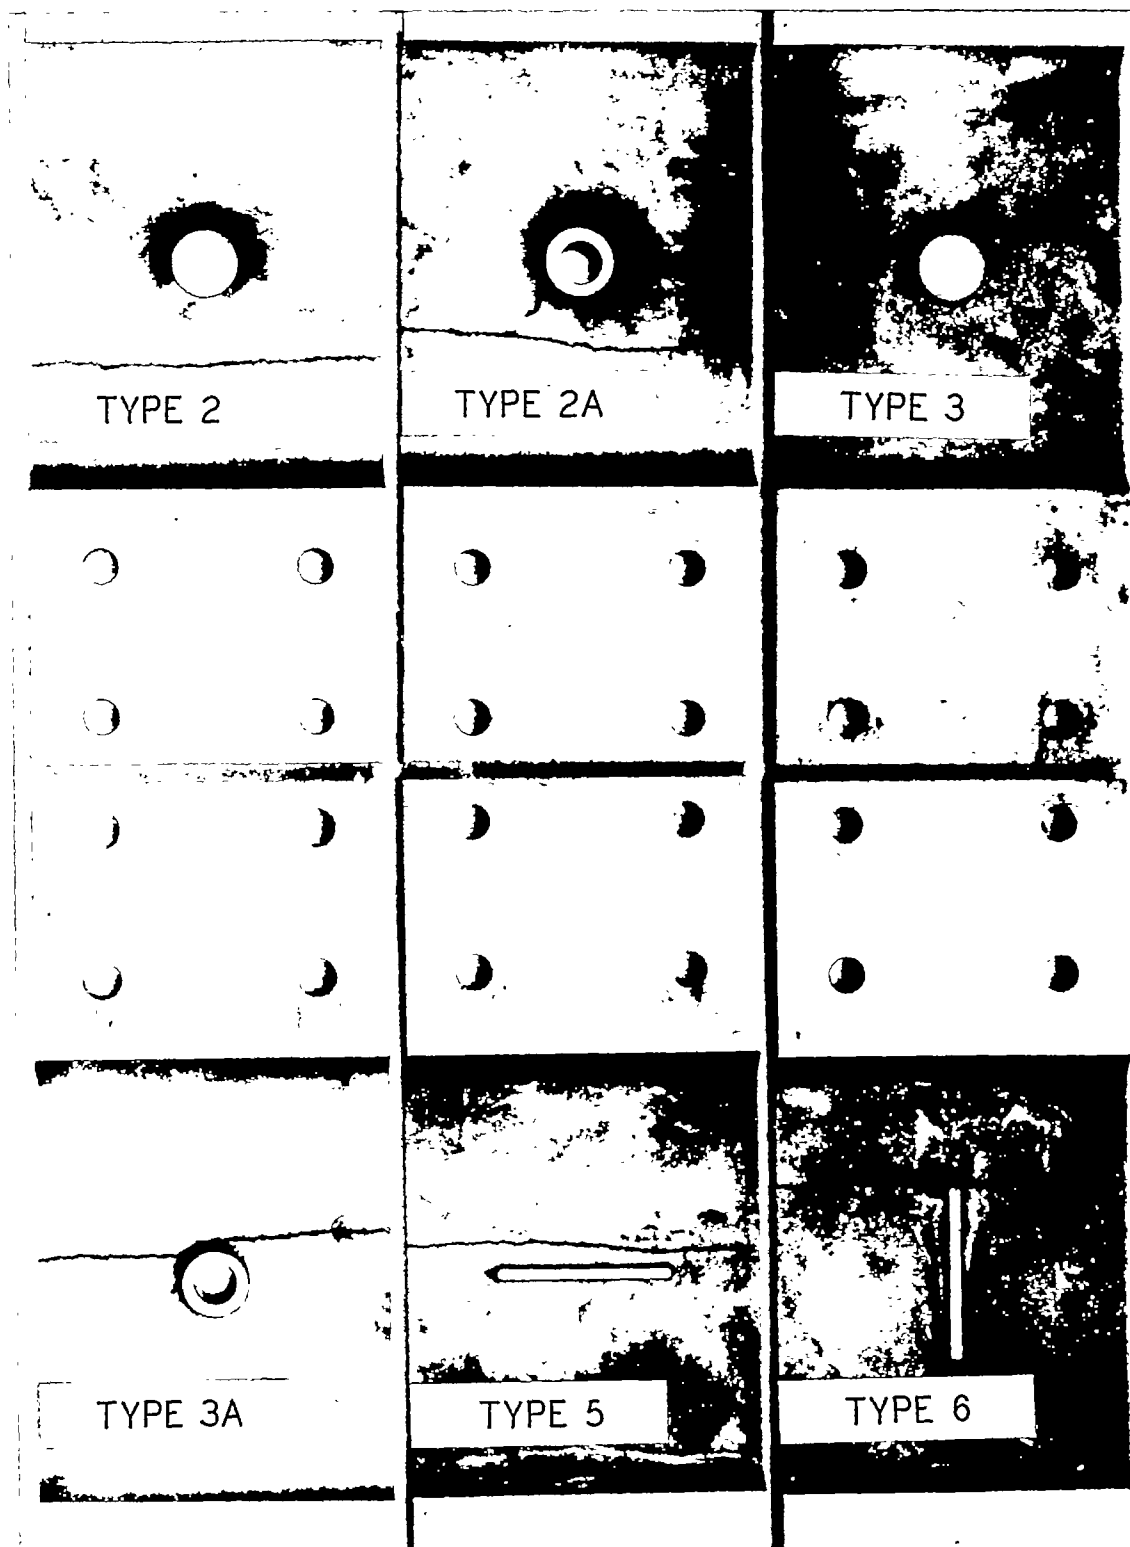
Typical fracture in fatigue specimens. Plate-type 355-T6 sand castings with bosses and ribs.
